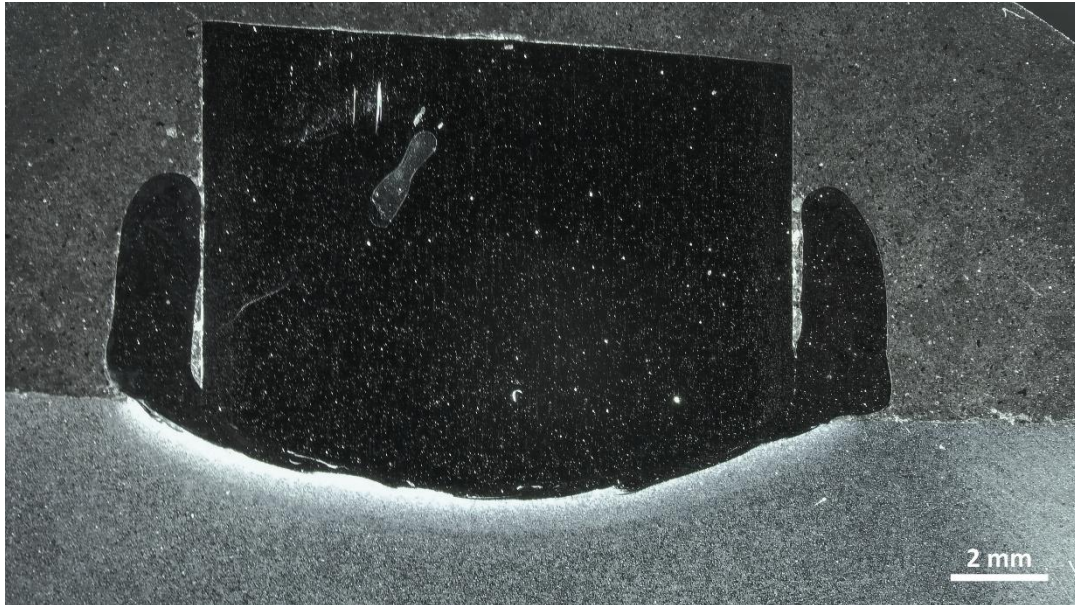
Macrostructure of the welded joint No. 1
